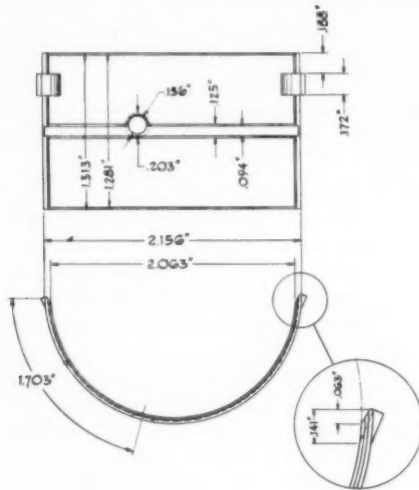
CONNECTING-ROD BEARING OF A 1935 LIGHT EIGHT ENGINE
